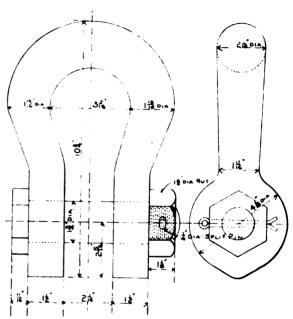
and 547 (Plate XXXVII.) show a similar cage complete with chains, balance beam, lengthener, Ormerod's detaching hook and rope socket. A detail of the shackle connecting the cage chains to the hangers is shown in figs. 548 and 549; the shackle connecting the pairs of chains to the balance beam in figs. 550 and 551; the balance beam, which is simply an iron or steel forging, in figs. 552 and 553; the shackle connecting the lengthener and balance beam in figs. 554 and 555; and the top and bottom shackles of the detaching hooks in figs. 556 to 559. All the above are for a working load of 6 tons.
